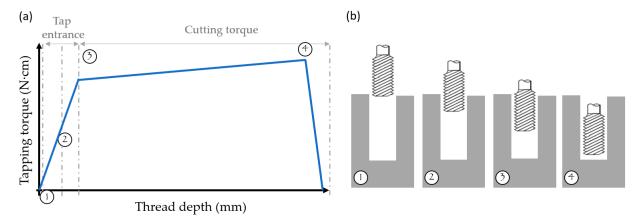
The tapping process: (a) graphical measurement of the tapping torque, (b) different positions of the tap during processing. (1) beginning of the cut, (2) tool penetrating the workpiece, (3) complete chamber teeth and (4) beginning of the reversal of the spindle.
